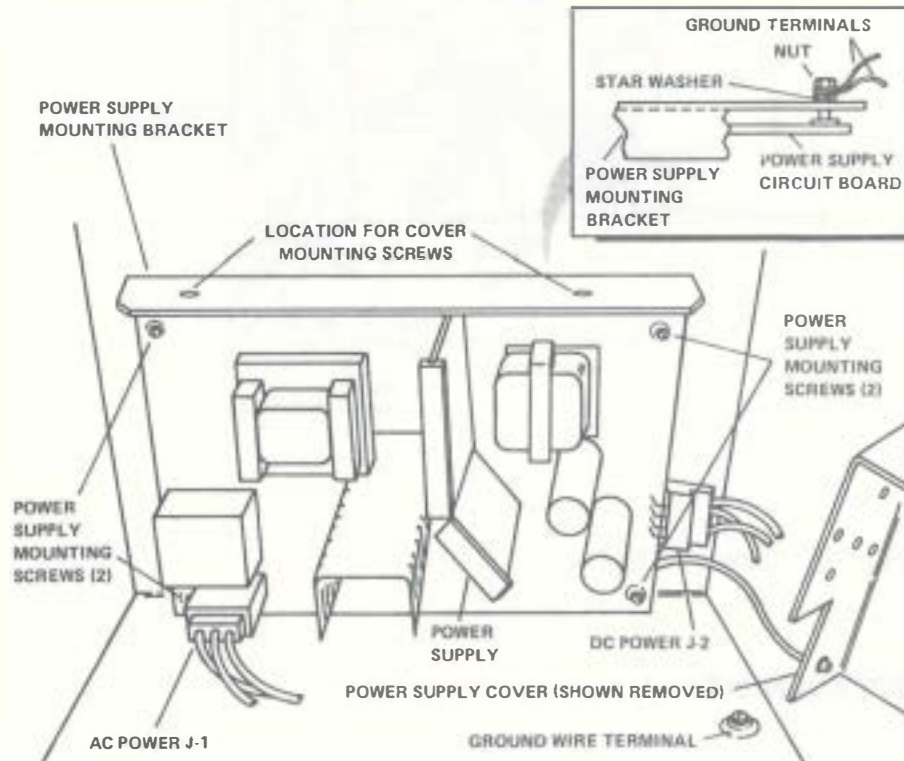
Power Supply - 8" Diskette (Viewing rear of diskette)
